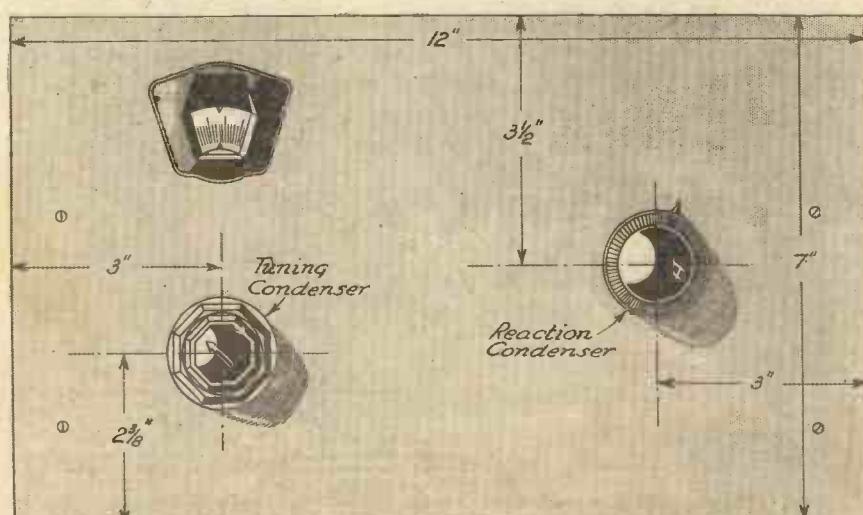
This drawing gives all panel dimensions and will be useful in drilling the ebonite.
